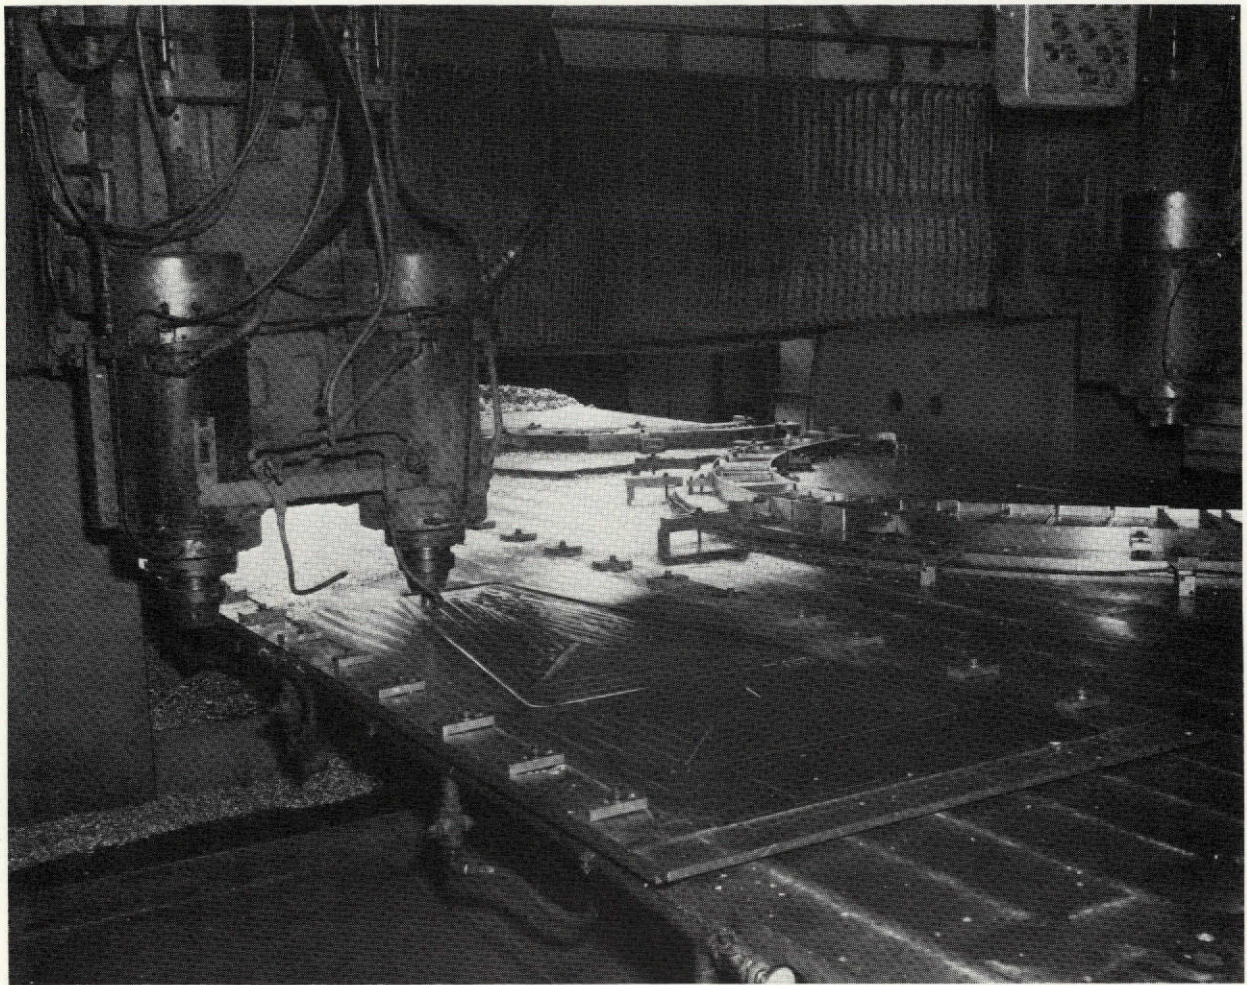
Gore Blank Sheet C on Skin Mill - USAF Plant 19
